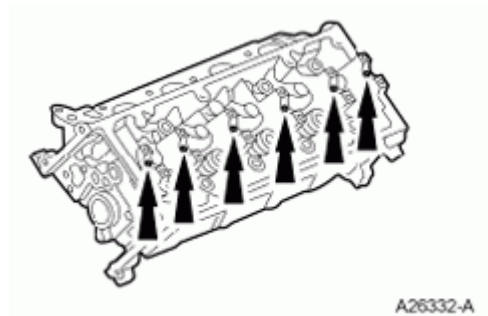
Locating Bolts, Bearing Caps And Camshaft
